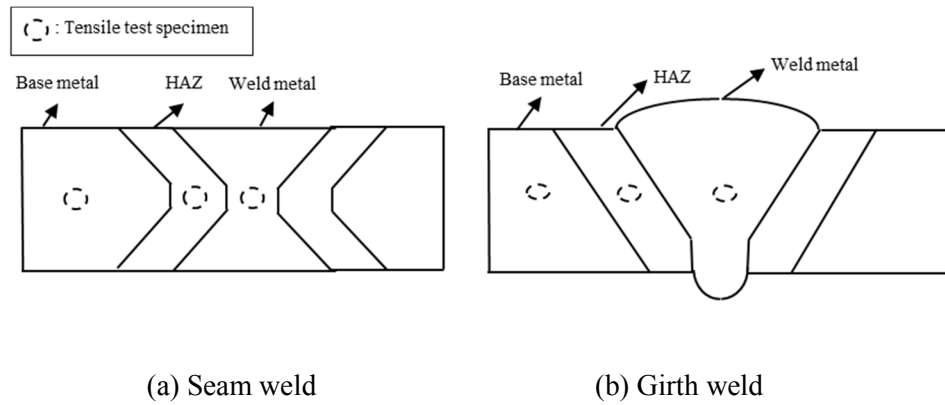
Diagrams of tensile specimen with seam and girth welds of API X70 pipe.
